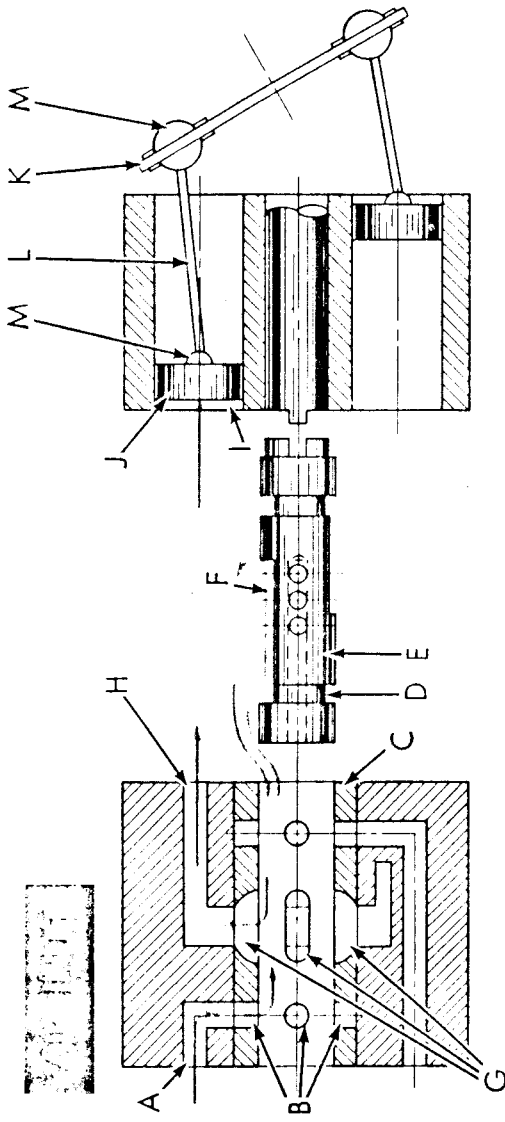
Following air inlet pressure through motors shown in Fig. 5-10 and Fig. 5-11. (Courtesy of Gardner-Denver Co.)
